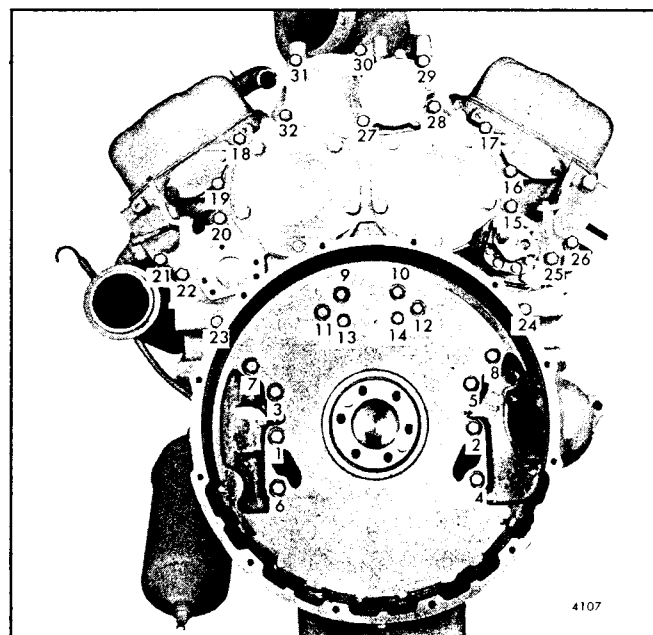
Flywheel Housing Bolt Tightening Sequence (Operation 2)--8V Engine
